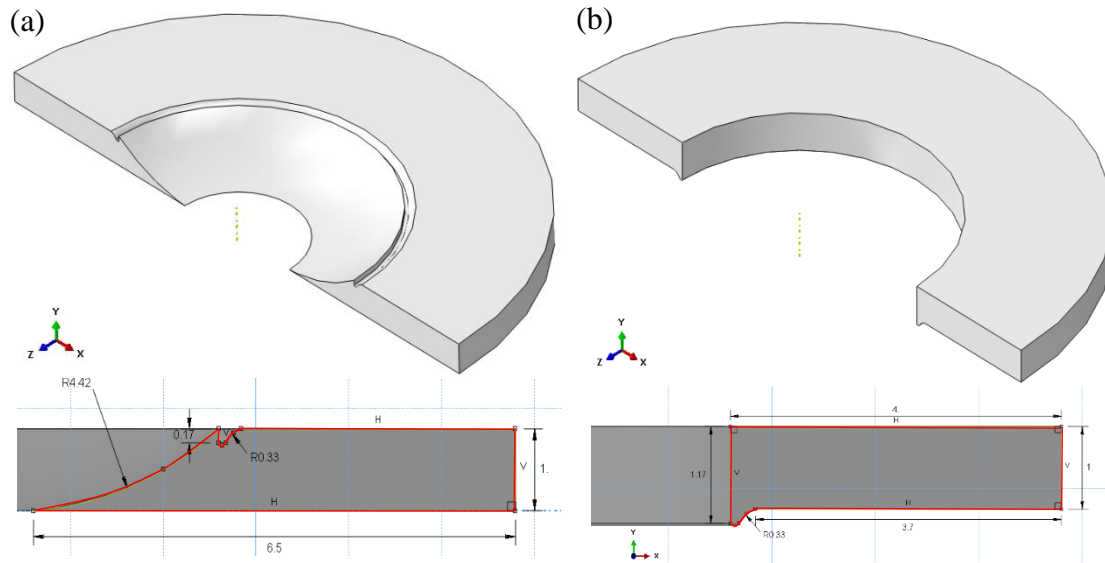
Geometry definition of the heat-affected zones for a similar RFSSW joint of AA6111 aluminium alloy for modelling a lap-shear test, showing the detail of the hook defect: (a) lower sheet, and (b) upper sheet.
